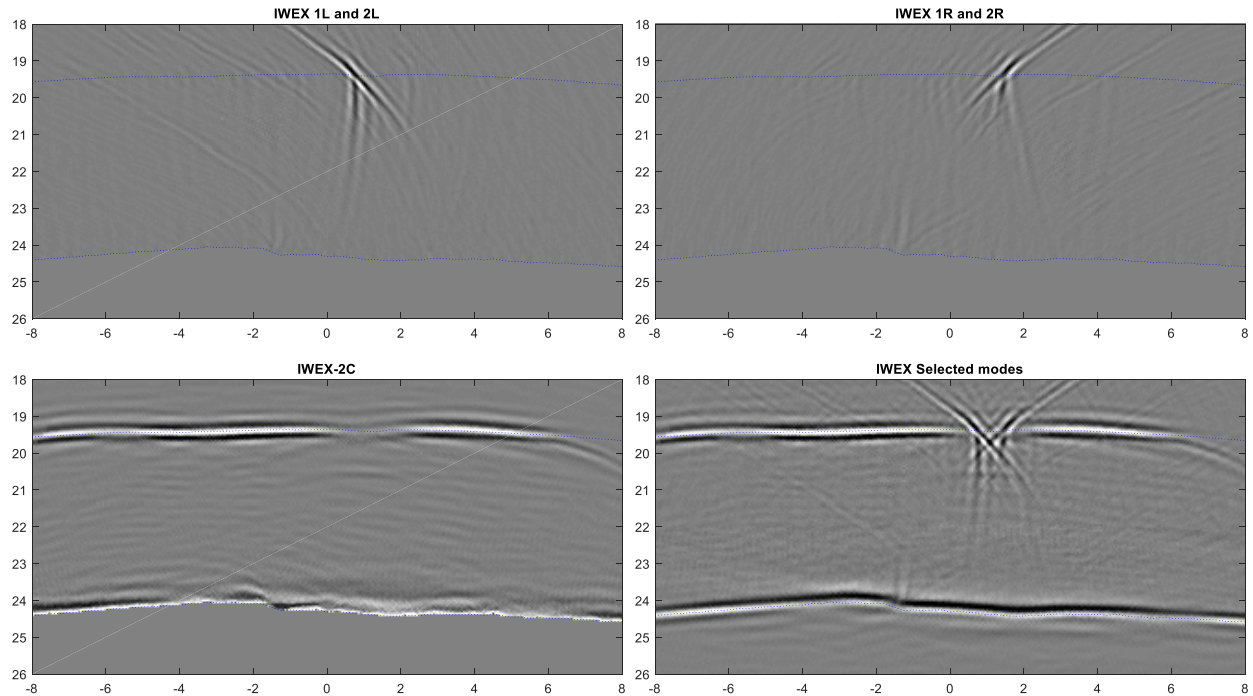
, Immersion IWEX measurements of an 8" pipe, ERW weld, 8 mm wall-thickness, with an OD notch.
